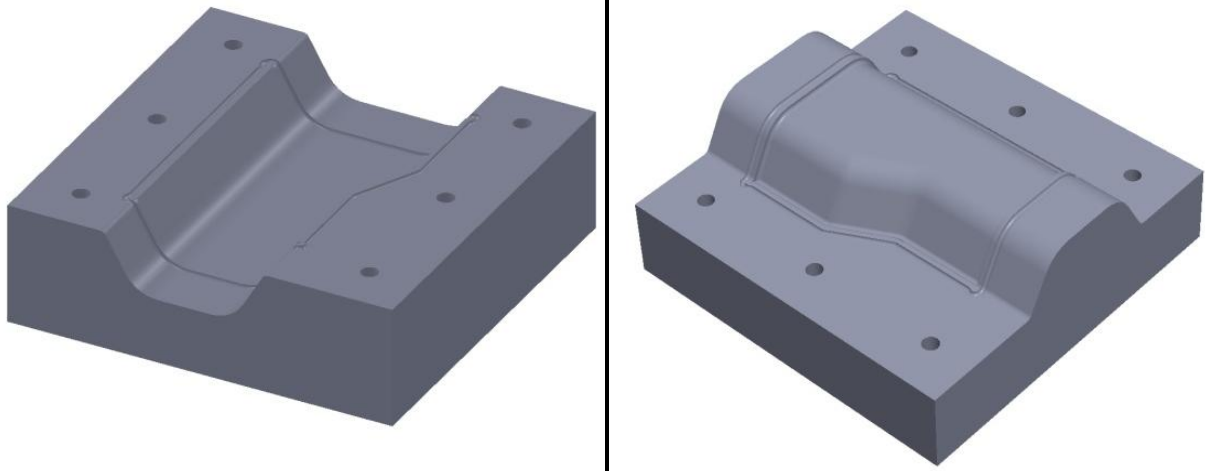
Solid model of the 3D mould: female mould (left) and male mould (right)
